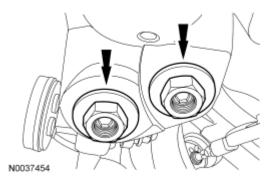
Locating Lower Ball Joint Nuts Courtesy of FORD MOTOR CO.
